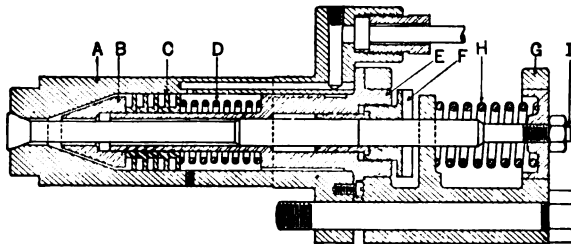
Craig sprayer. (a) Spray valve body. (b) Stop. (c) Perforated atomiser plates. (d) Spring holding plates against (b). (e) Valve guide tube. (f) Stuffing-box. (g) Projection holding tube in place. (h) Valve spring. (i) Spray valve, opening outwards.
